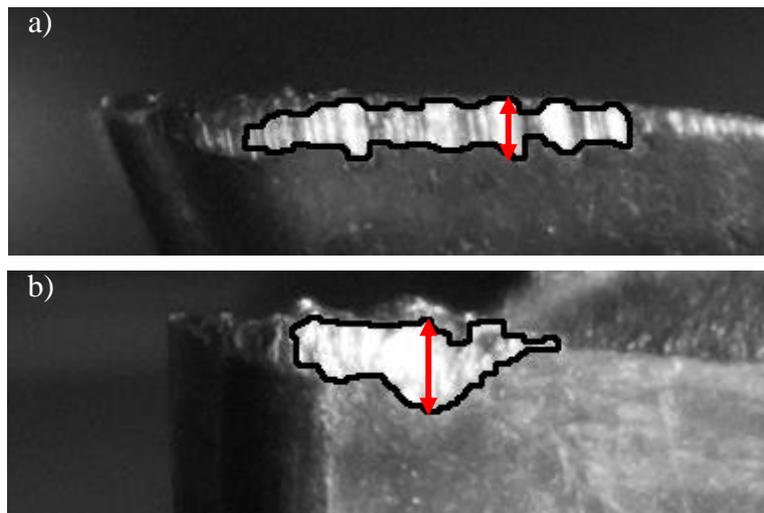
Results of edge detection on the cutting tools; a) Cutting tool A, b) Cutting tool B
